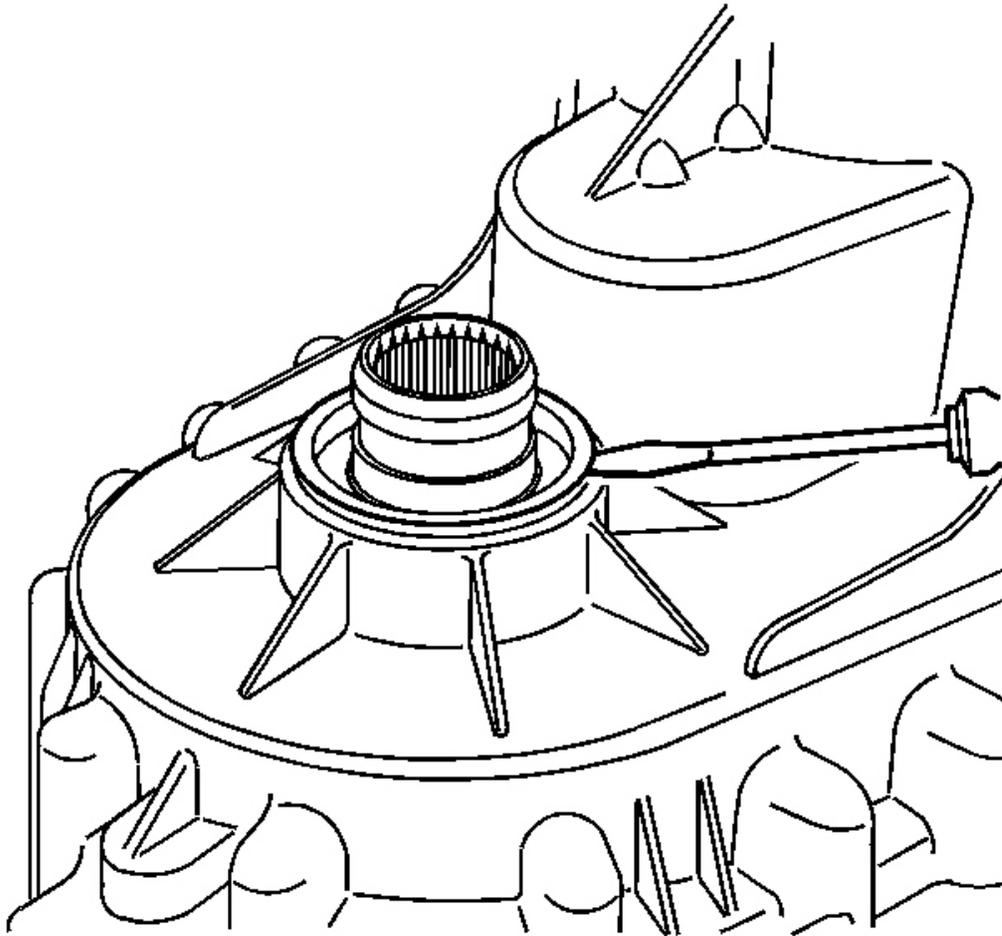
Locating Outer Lip Of The Front Output Shaft Seal
